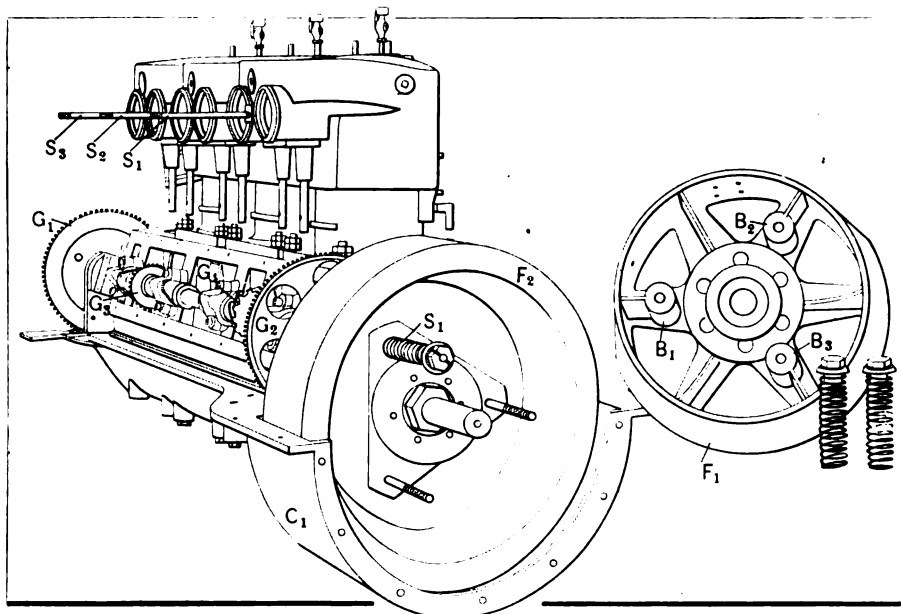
Showing the 30-horsepower Corbin motor, with the clutch disassembled and valve gear cover removed
